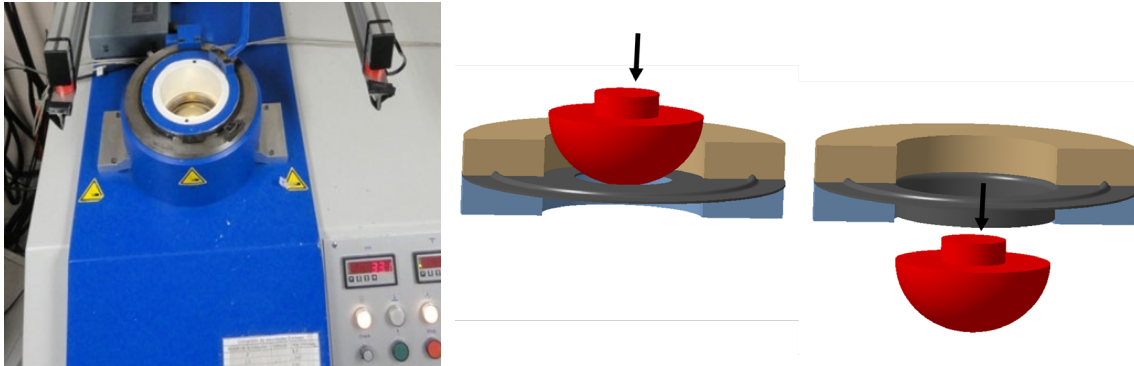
Erichsen machine setup and schema of conventional hole-flanging process.
